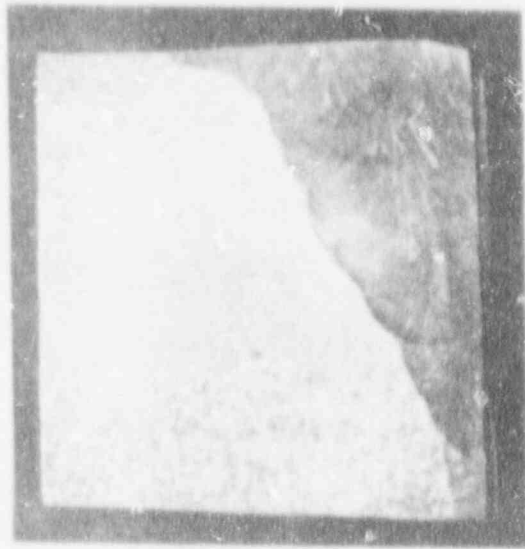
Cross sections showing the location of the crack with respect to the weld
